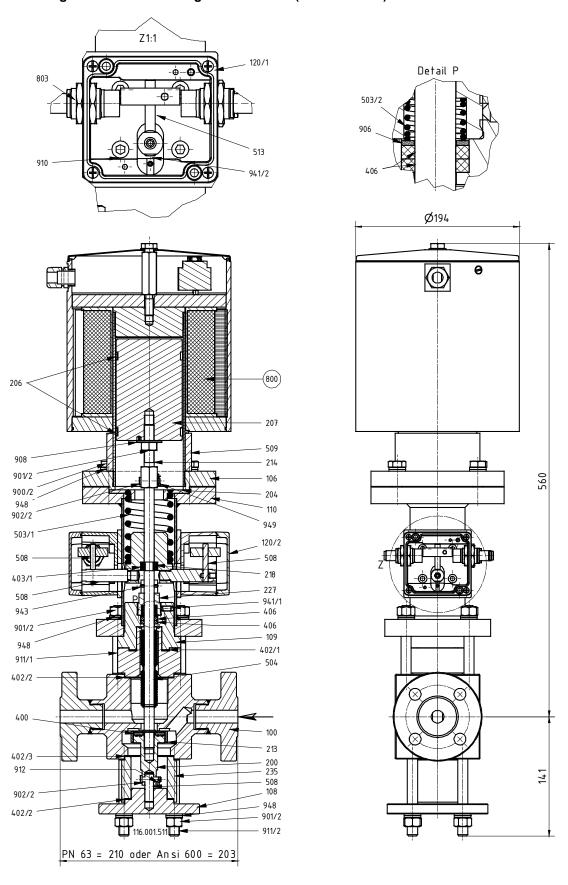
sectional drawing 50/55-EVF-R.. (3 limit switch)
